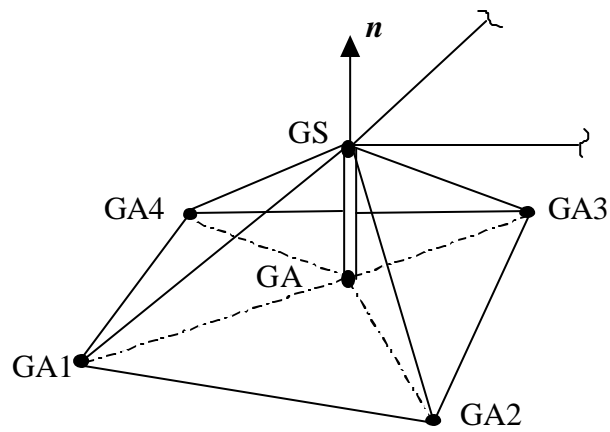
Spot Weld with Point to Patch Connection.
